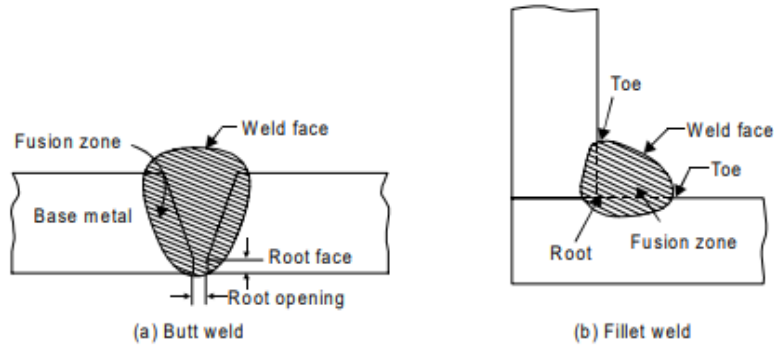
Shows Terminological Elements of Welding Process (wordpress.com).
